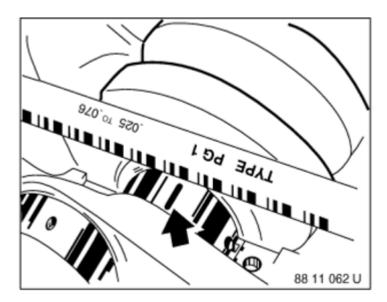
Measuring Main Bearing Play Using Measurement Scale
